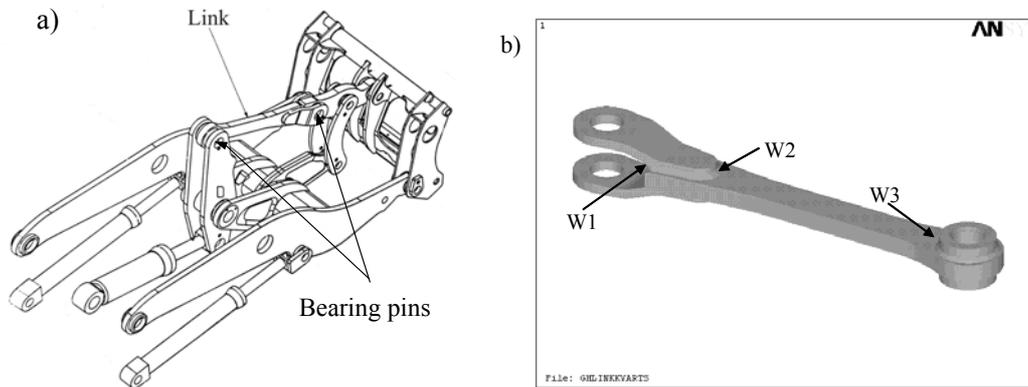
Schematic picture of the placement of the link and the critical welds. W1-W3 are the welds that will be investigated according to fatigue.
